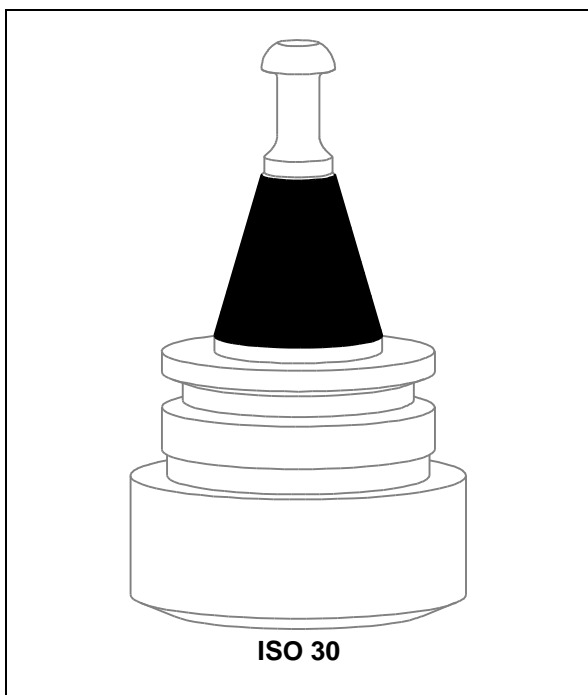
Conical surface of an ISO 30 tool holder (in black)
